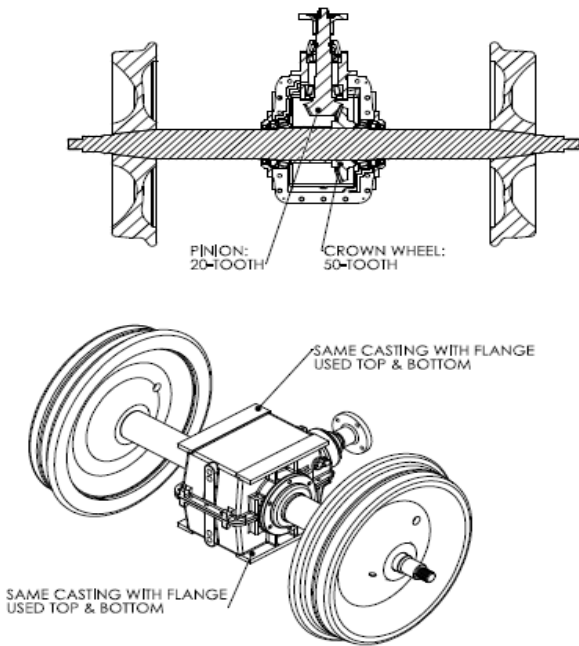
Mechanical Assembly drawing of the front wheelset with the differential
